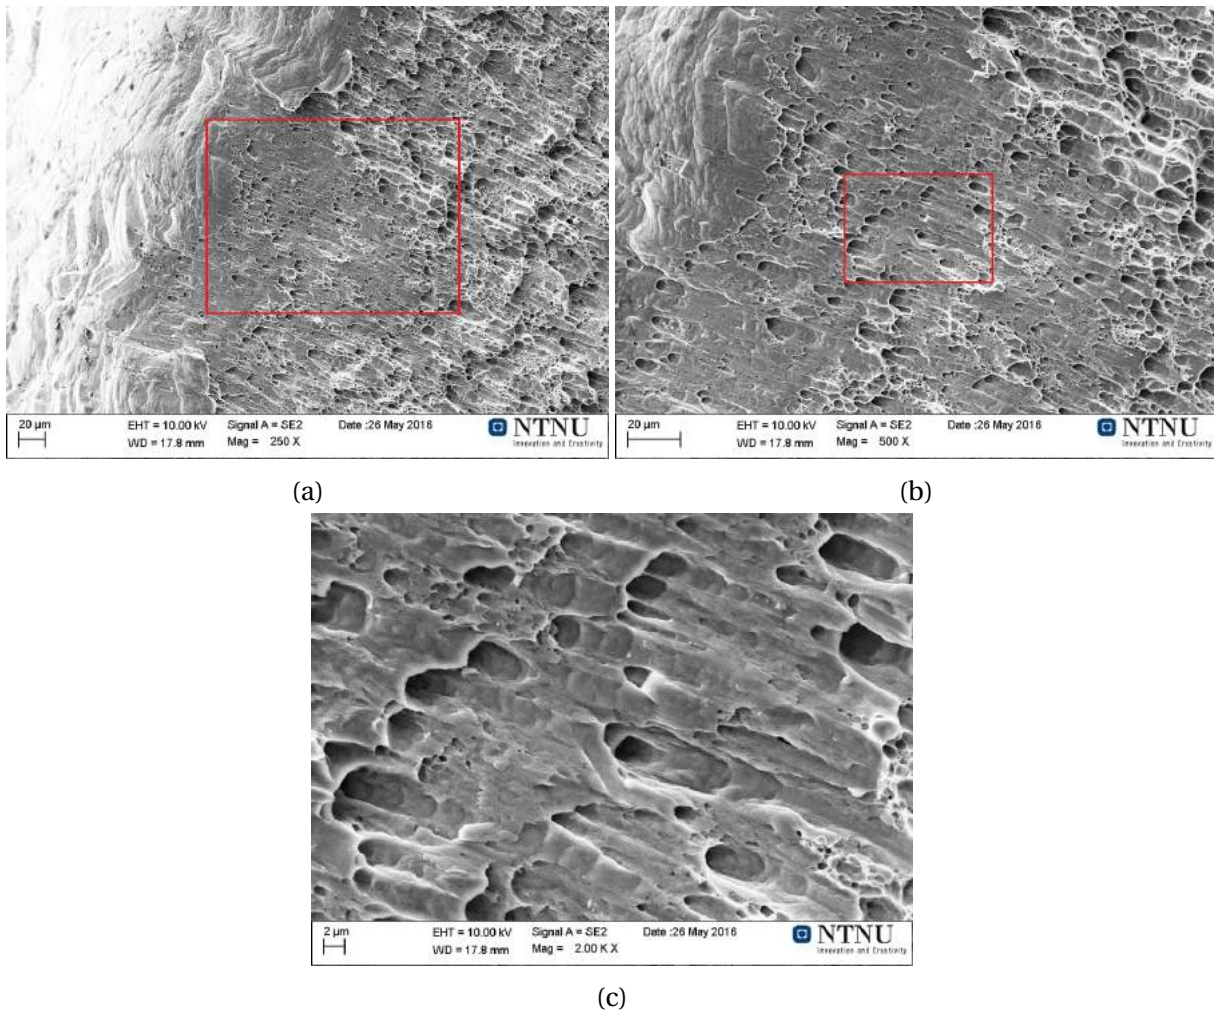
Fracture surface of conventional ram extruded Al-5%Mg.
